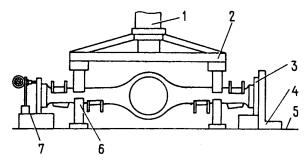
Straightening Rear Axle Beam. Diagrammatic:
